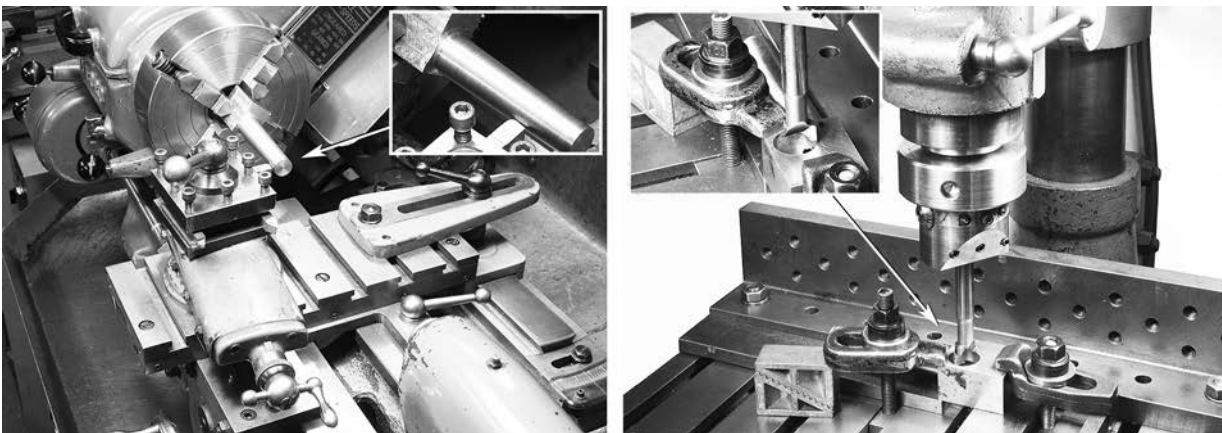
Turning the No.2 Morse taper using the lathe taper turning attachment, and (right) boring the body for the feed pinion spindle
